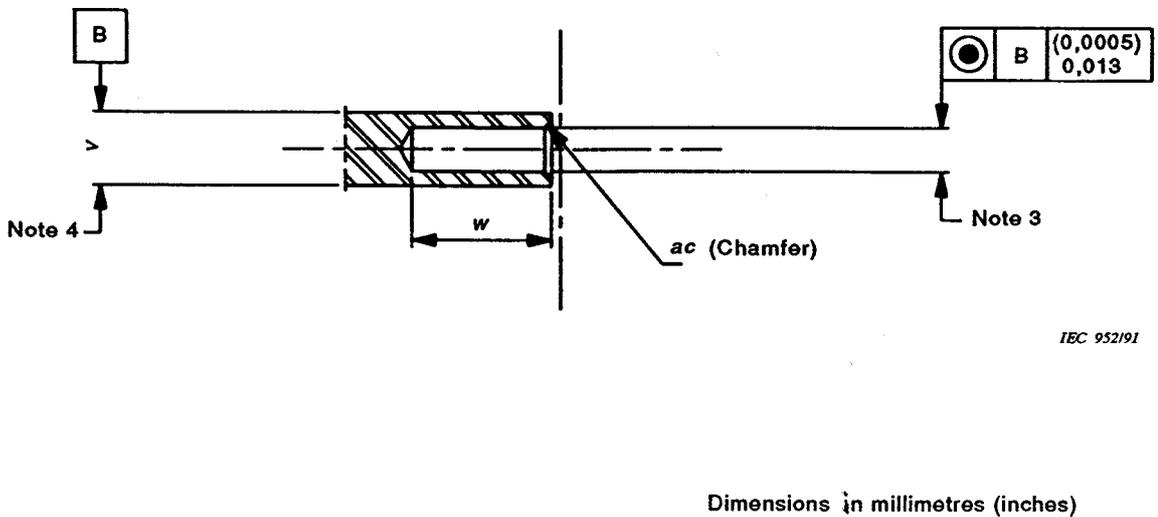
Socket contact (for dimensions, see table 1 which follows)
